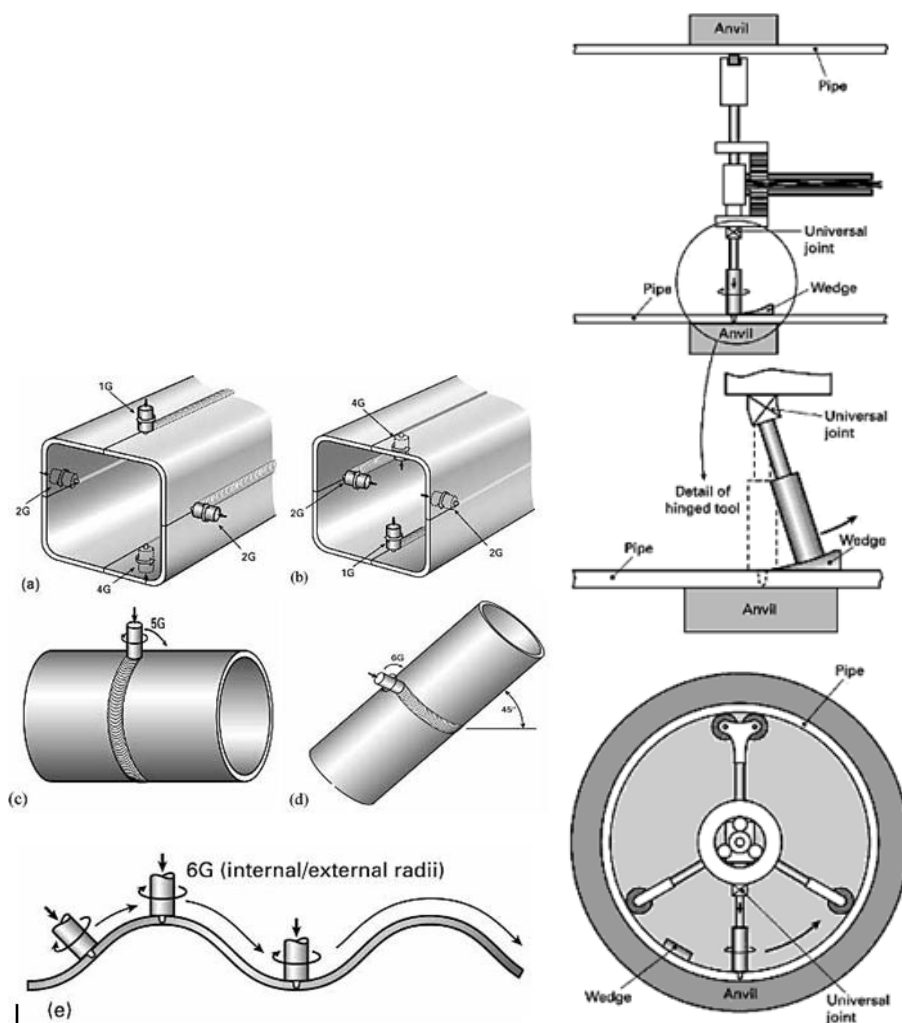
a) External Welding of hollow component, b) Internal Welding of hollow component, c) Welding stationary horizontal pipe, d) Welding stationary 45° angled pipe, e) Welding a corrugated component, f) FSW design concept facility for butt welding of line pipe. Comprising a hinged flexible drive head together with a longitudinal positioned 'run off' wedge plate, designed to eliminate any end of run hole filing requirements. Side view and end view (Thomas & Dolby, 2002).
